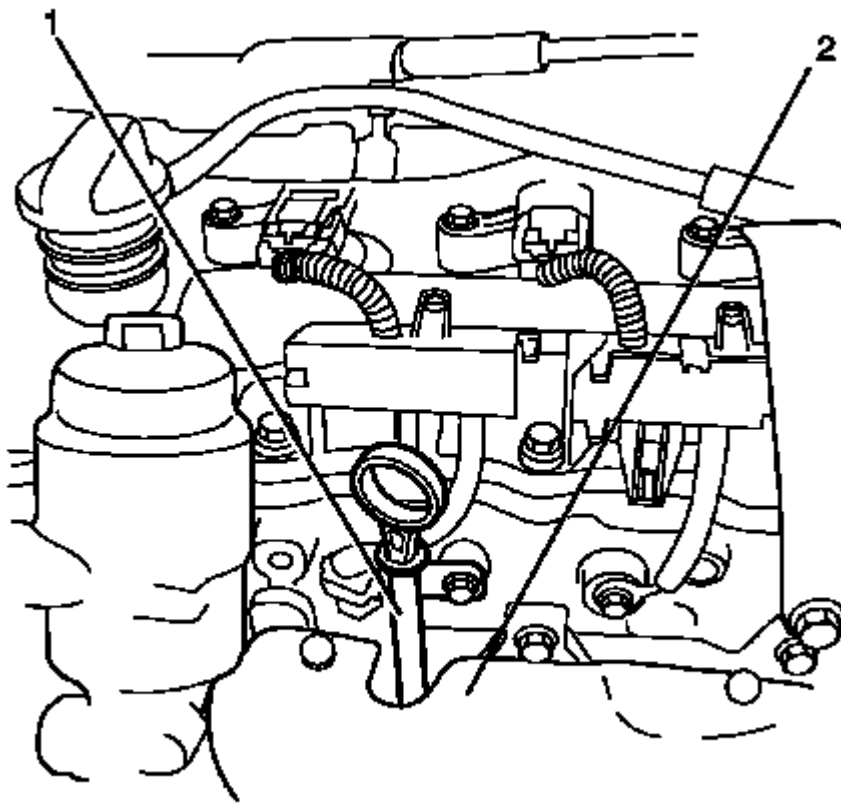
Identifying Oil Level Indicator Tube & Exhaust Manifold
